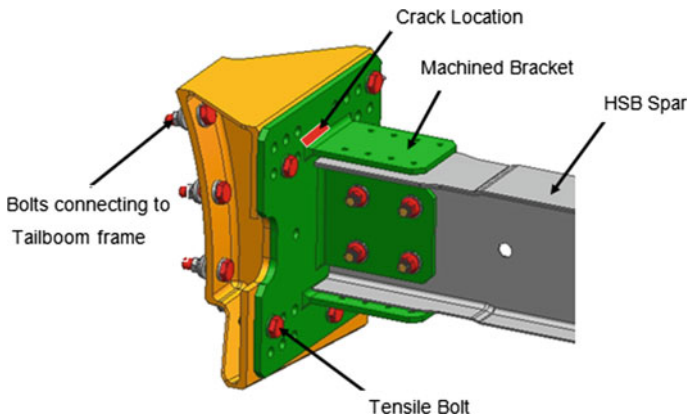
Detailed view of machined bracket attachment showing failure
